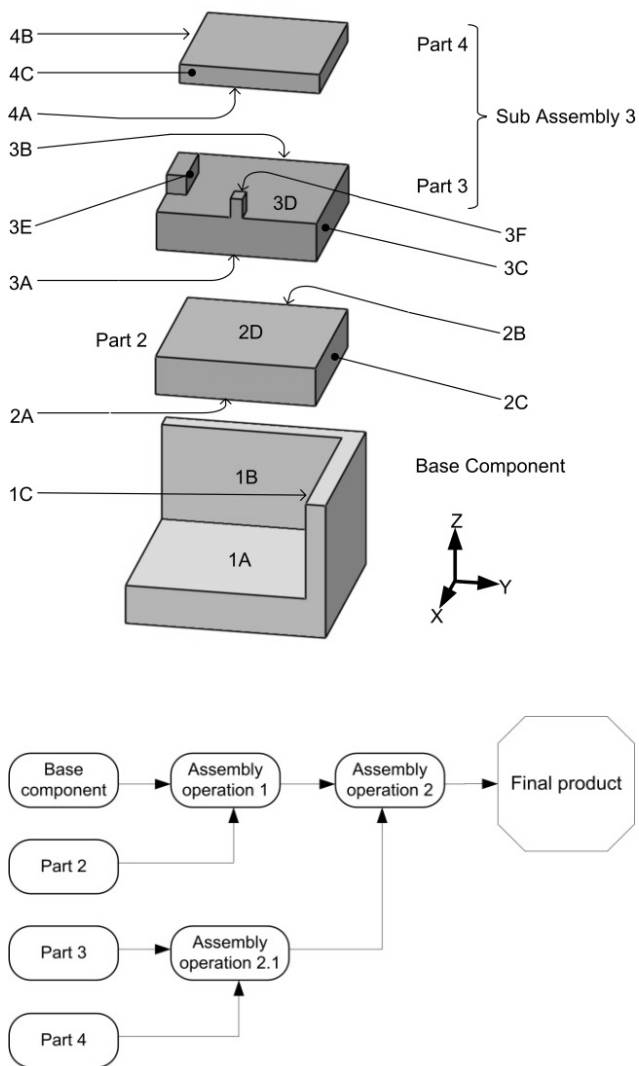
Exploded view of the assembly, showing the assembly features, and the assembly sequence diagram
